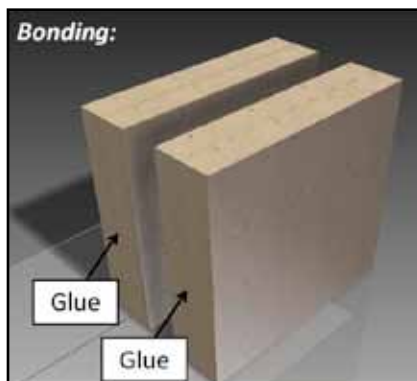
The mold is four pieces thick. But only the outer edges are glued together.
